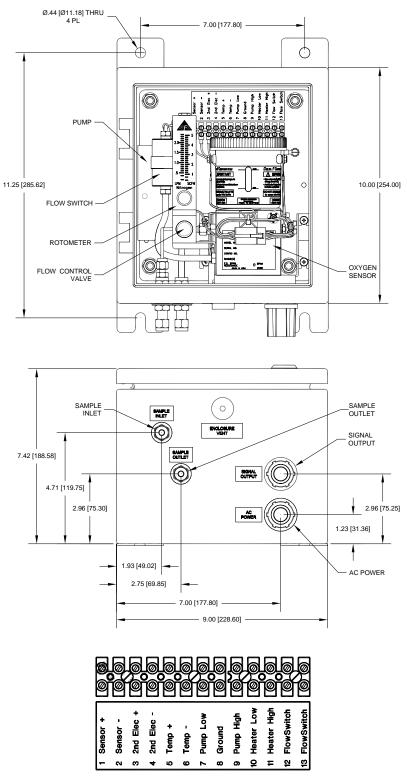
Remote Sensor Mounted in NEMA 4 Enclosure
